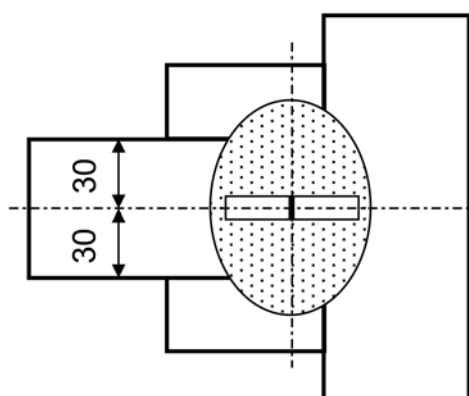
Charpy impact test specimen. (Notch location : weld metal center)
